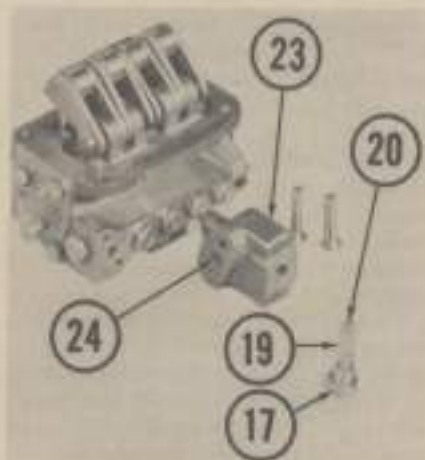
Partially disassembled view of the hold position valve. Refer to Fig. 149 or 150 for legend.
